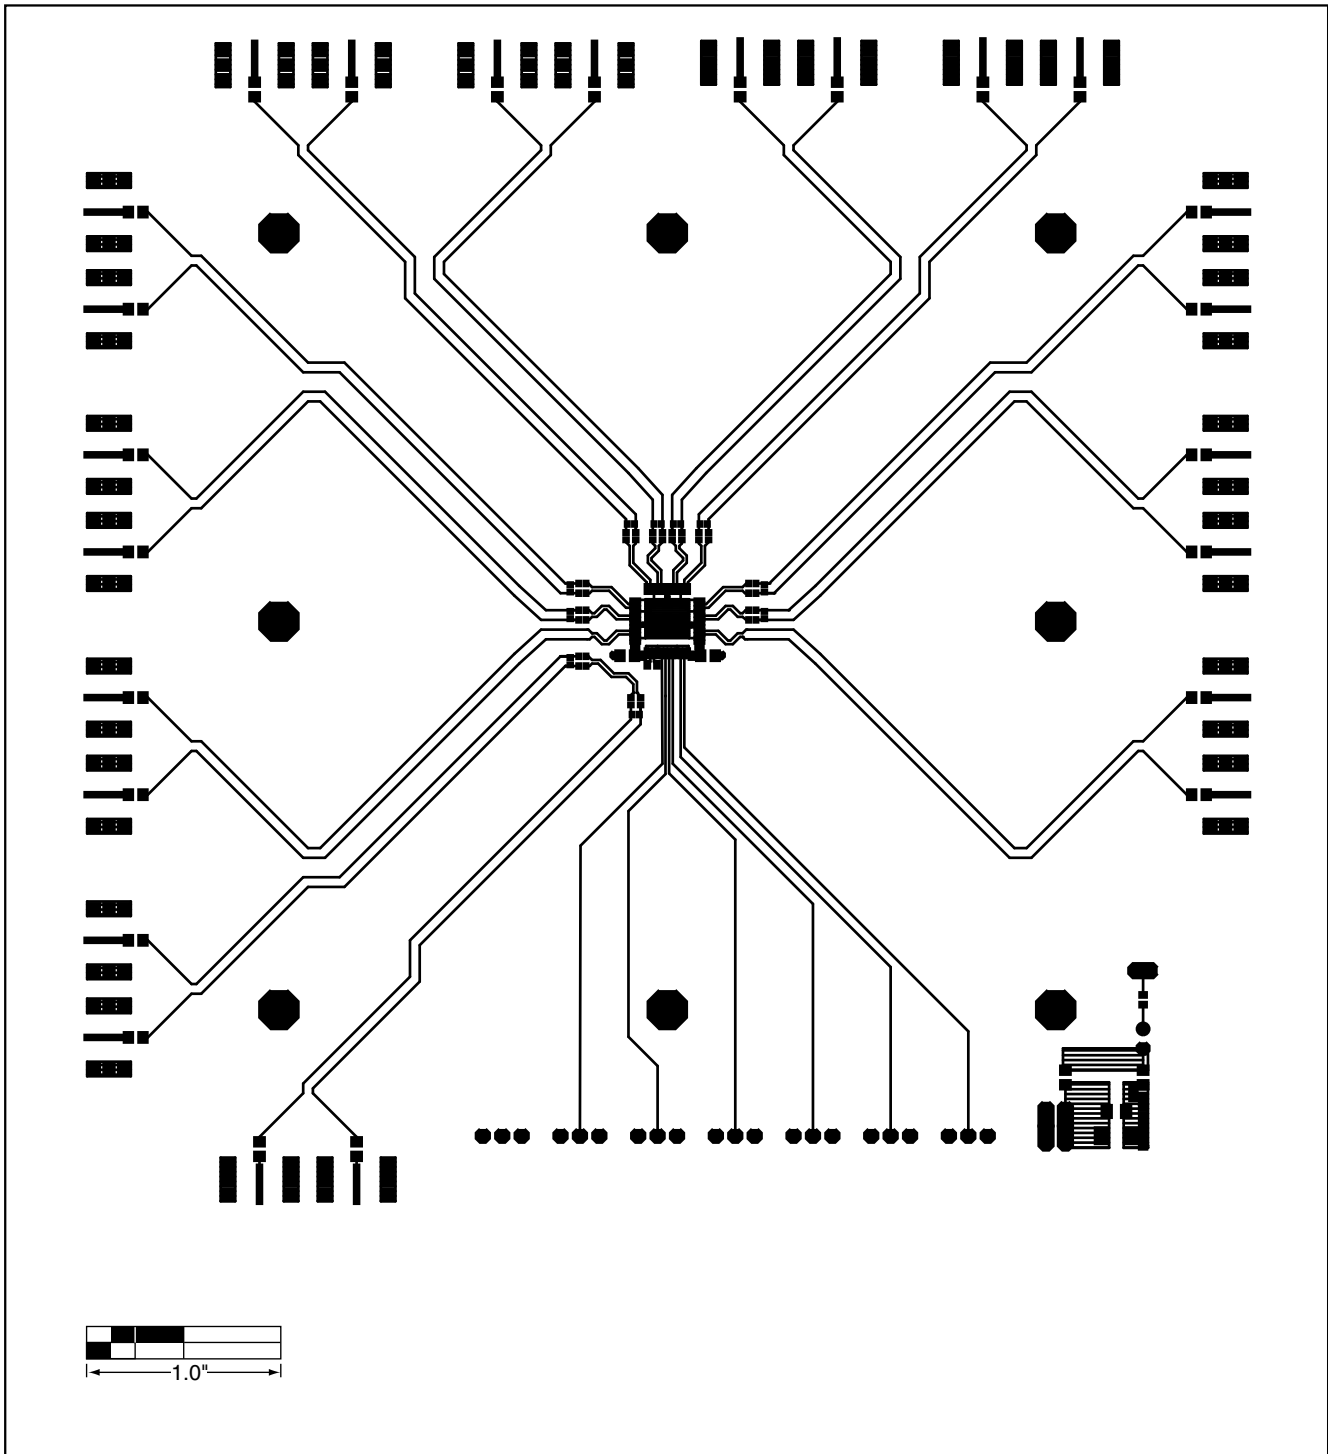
MAX3754/MAX3755 Evaluation Kit PC Board Layout—Component Side
